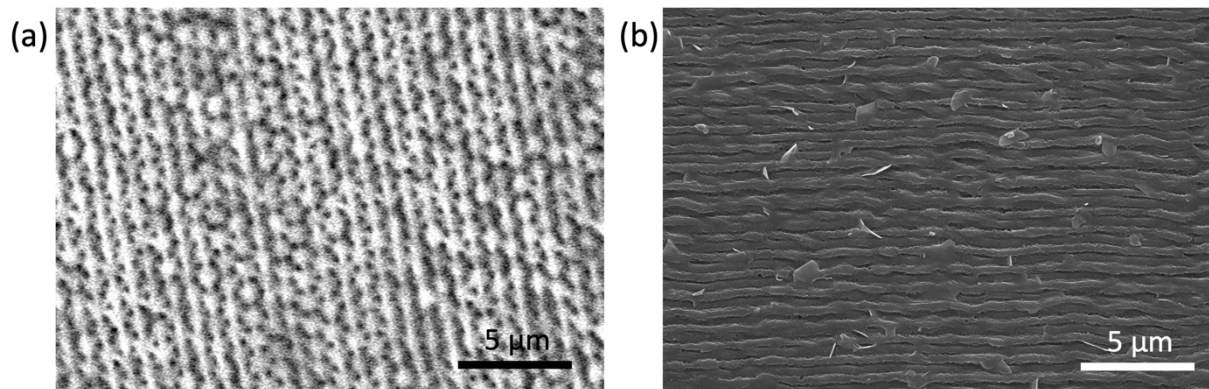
SEM images of injection-molded plastic samples produced with mold B (a) and mold C (b).
